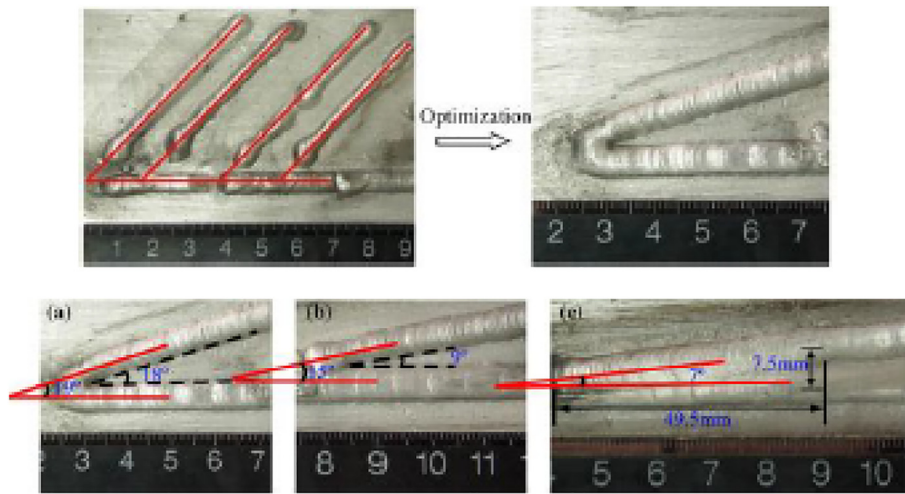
Comparing the as-deposited cross structure without dimension correction (up-left) and layer size correction by optimizing of wire feed manner (up-right), plain shapes with a sharp angle of 10, 15, and 20° (bottom) [71,315]
